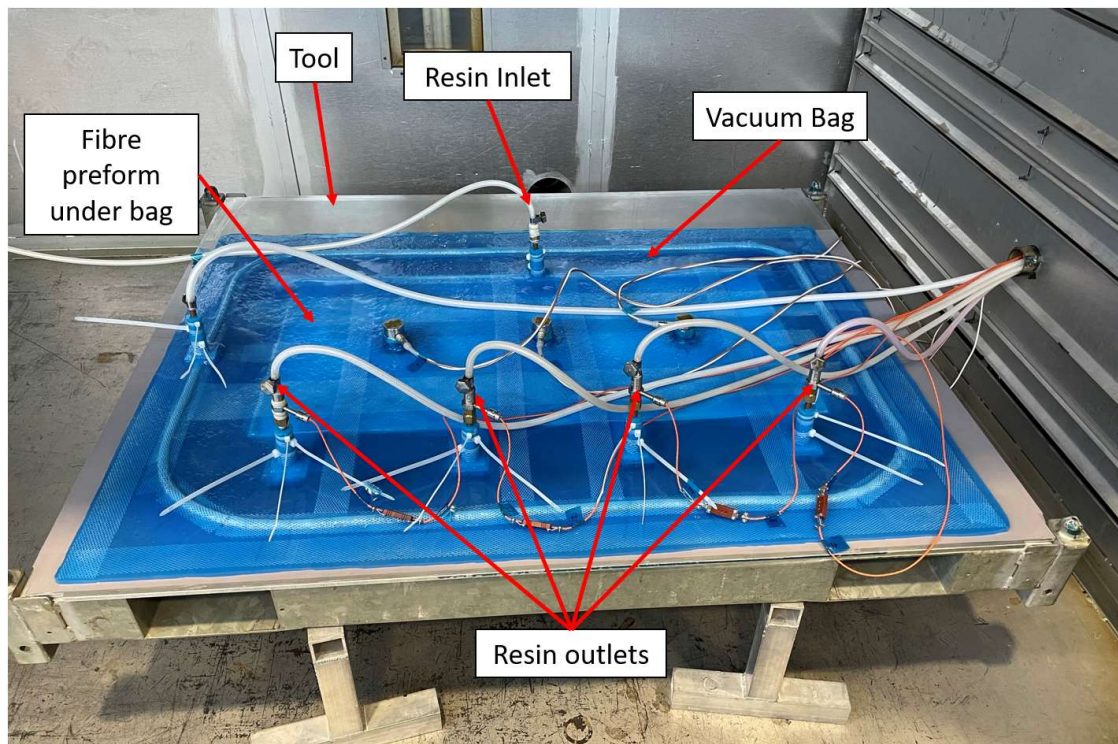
Flat panel aluminium tool with a silicone vacuum bag
